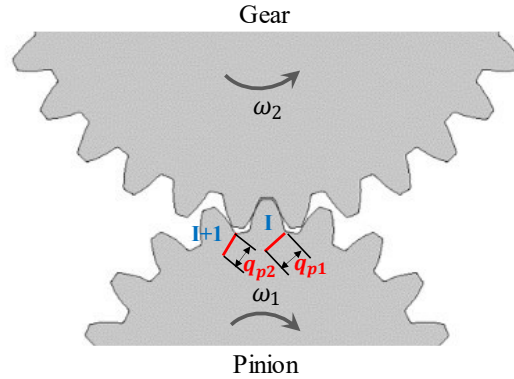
Two adjacent tooth cracks on the pinion and a healthy gear
